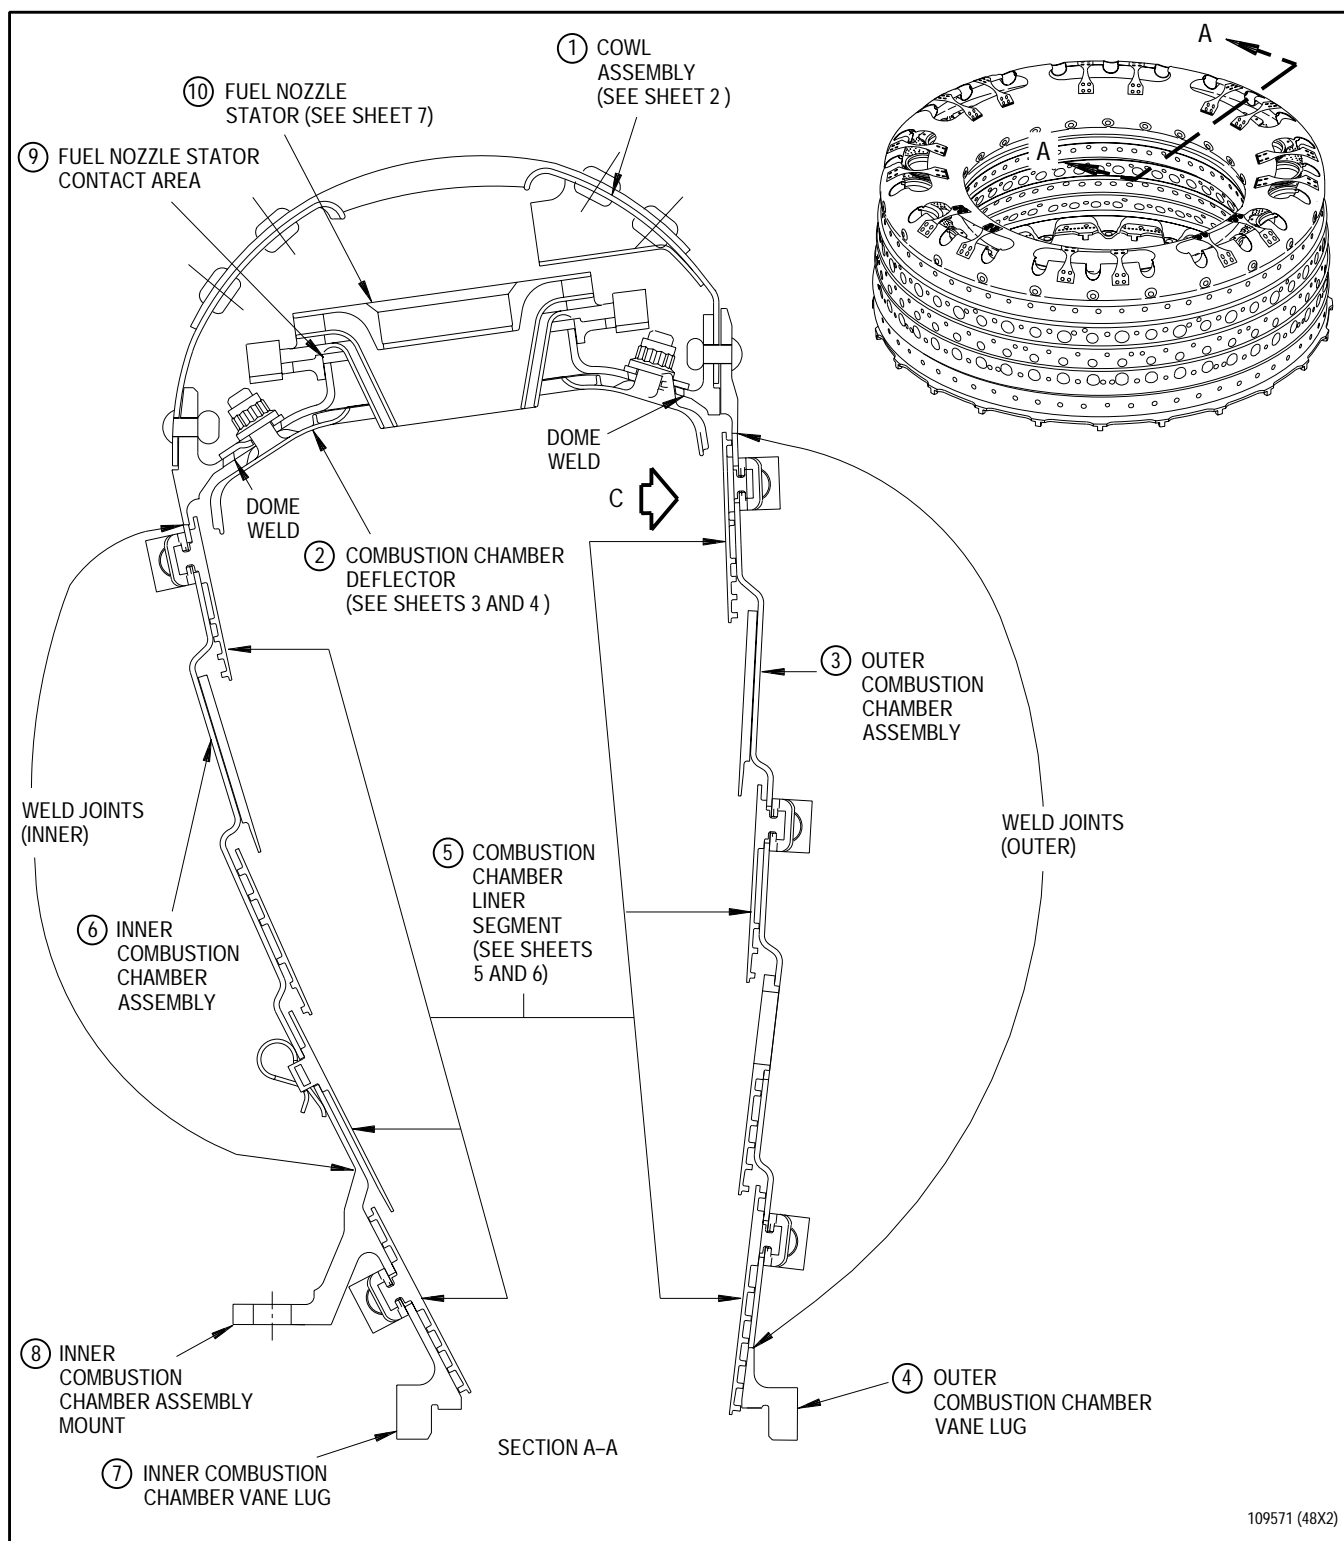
Combustion Chamber Assembly - Inspection (Sheet 1 of 7)
